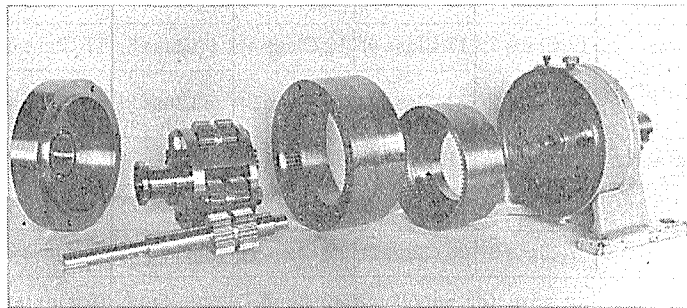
Inside View of 3K Type Planetary Gears built as a Trial
